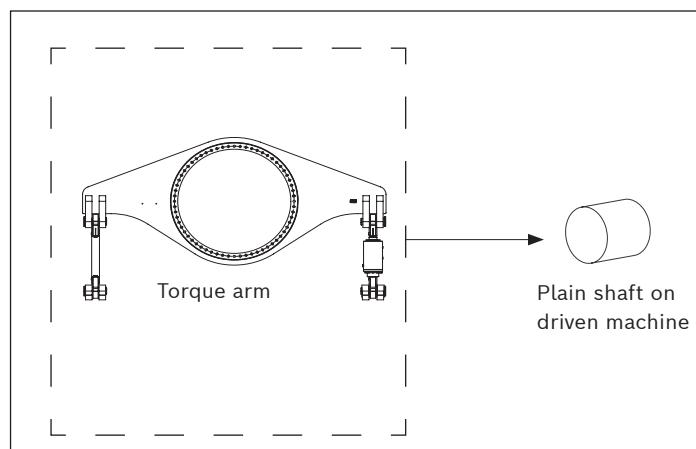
Double ended torque arm mounting with plain shaft (Coupling adapter is needed for spline motors)
